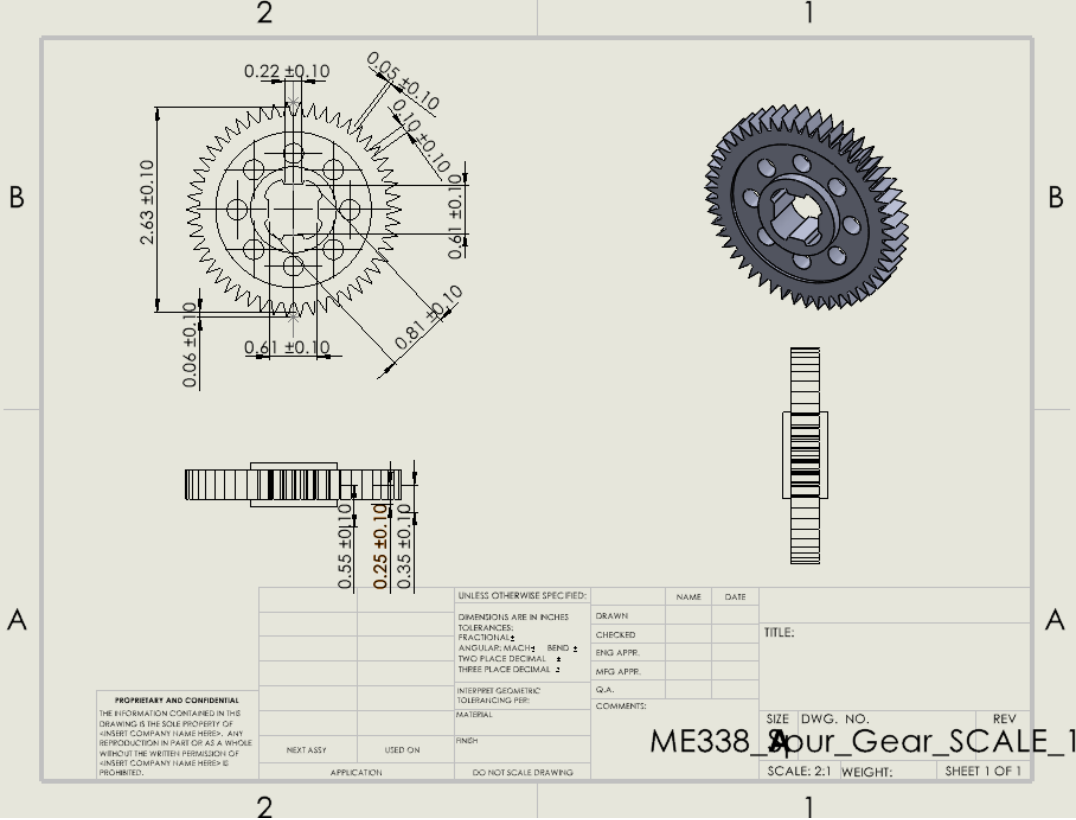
Spur Gear Dimensions with GD&T and Tolerances
